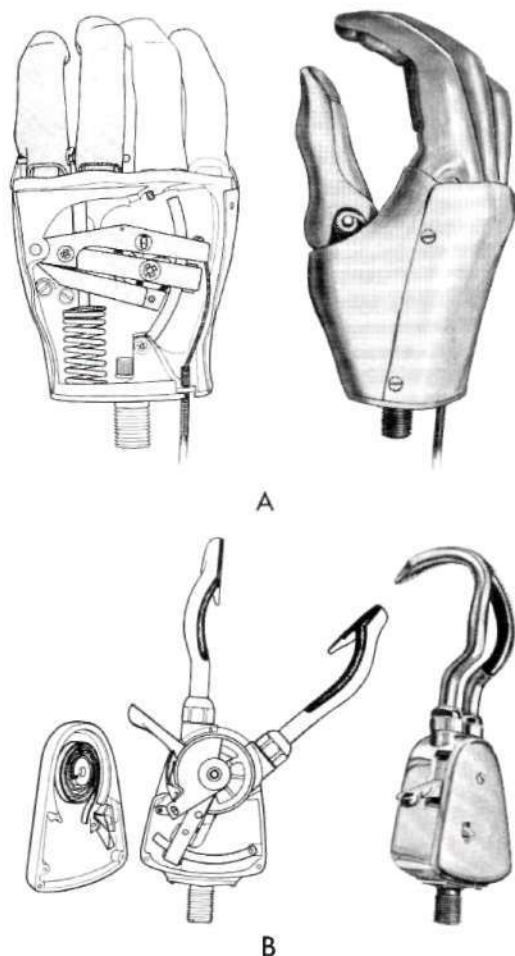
Voluntary-closing terminal devices. A, APRL-Sierra Hand; left, cutaway view showing mechanism; right, assembled hand without cosmetic glove; B, APRL-Sierra Hook.
